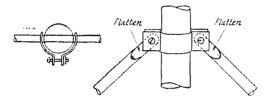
Method of mounting elements shown at the left requires drilling the boom, but provides inexpensive and secure assembly. Clips are cut from sheet aluminum and bent to fit. The mounting of the suspension bracing arms to the vertical support is shown at the right. Braces are flattened at the ends and bolted to brackets that clamp to the supporting pipe.
